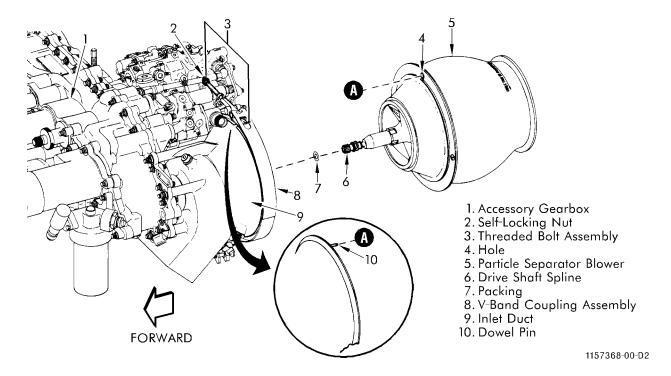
Particle Separator Blower and V-Band Coupling Assembly; Removal and Installation
